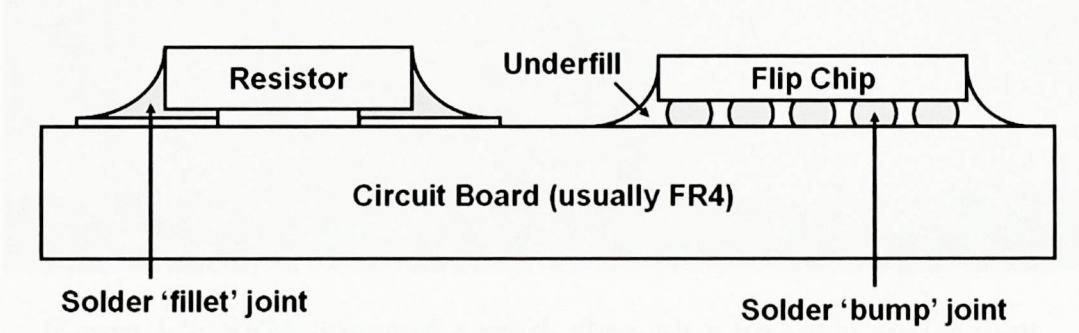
Two common types of soldered assemblies, a surface mount resistor and a flip chip.
